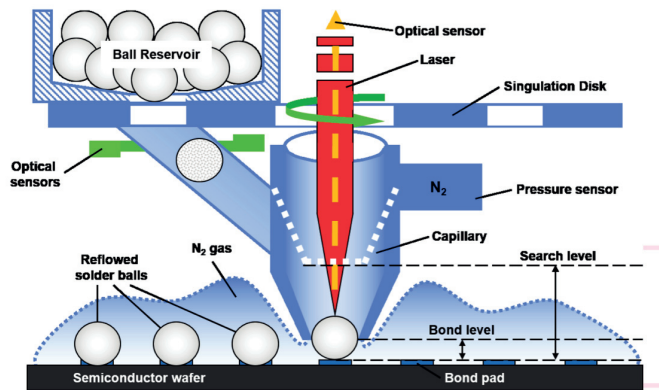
Illustration of the laser system used for the solder balling. Image taken from [74].
